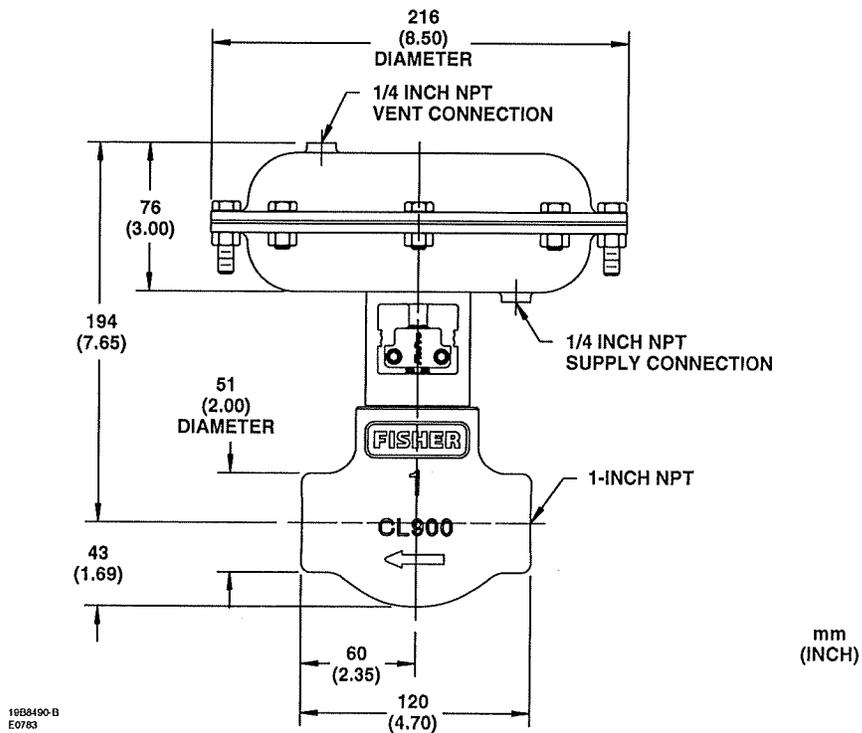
Type D2 Dimensions (Spring-to-Close Configuration Shown)
